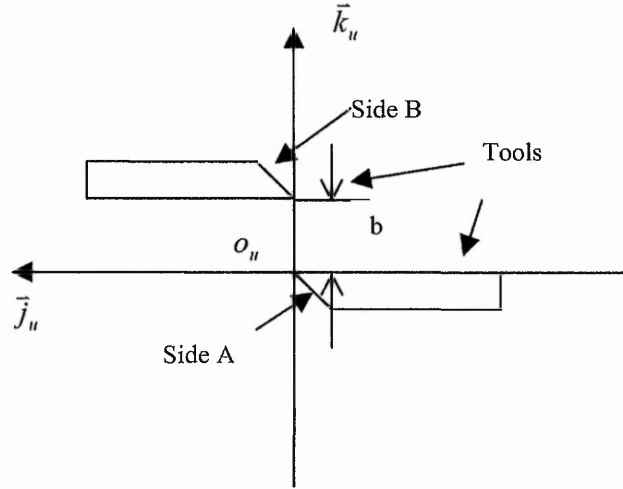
The tool positions for generating two sides of the worm tooth thread
